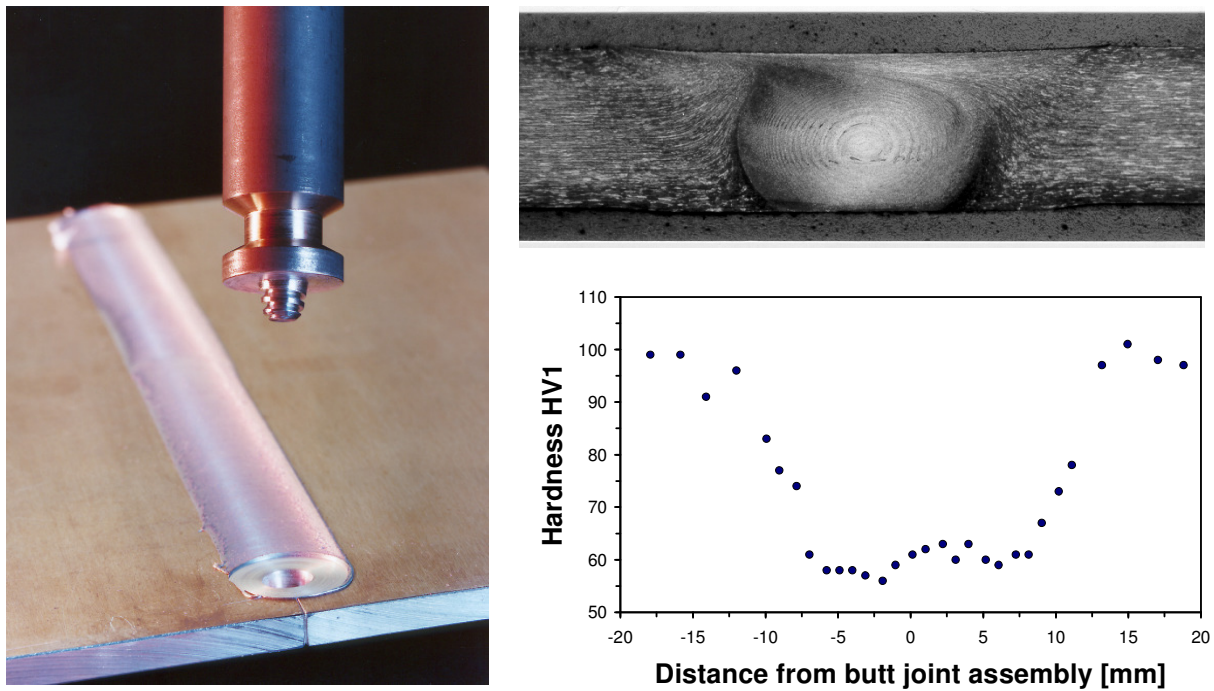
Friction stir welding on aluminium plates made of EN AW6082 material (left: welding seam and tool; right: macro-examination specimen and hardness continuum)[9]
